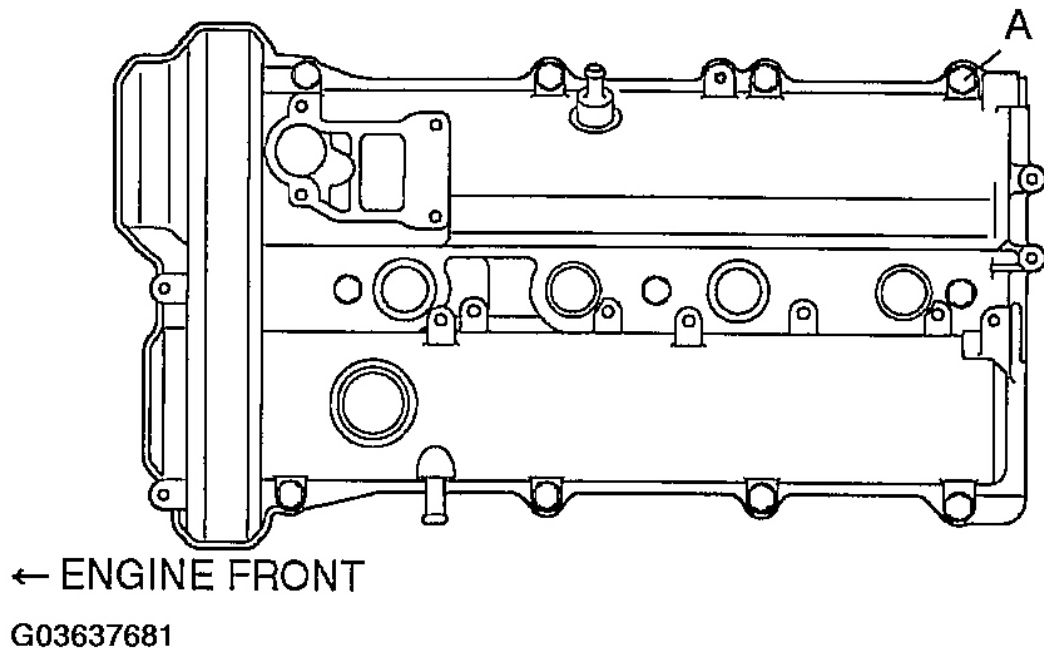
Tightening Cylinder Head Cover Bolt On Portion Of Cylinder Head
